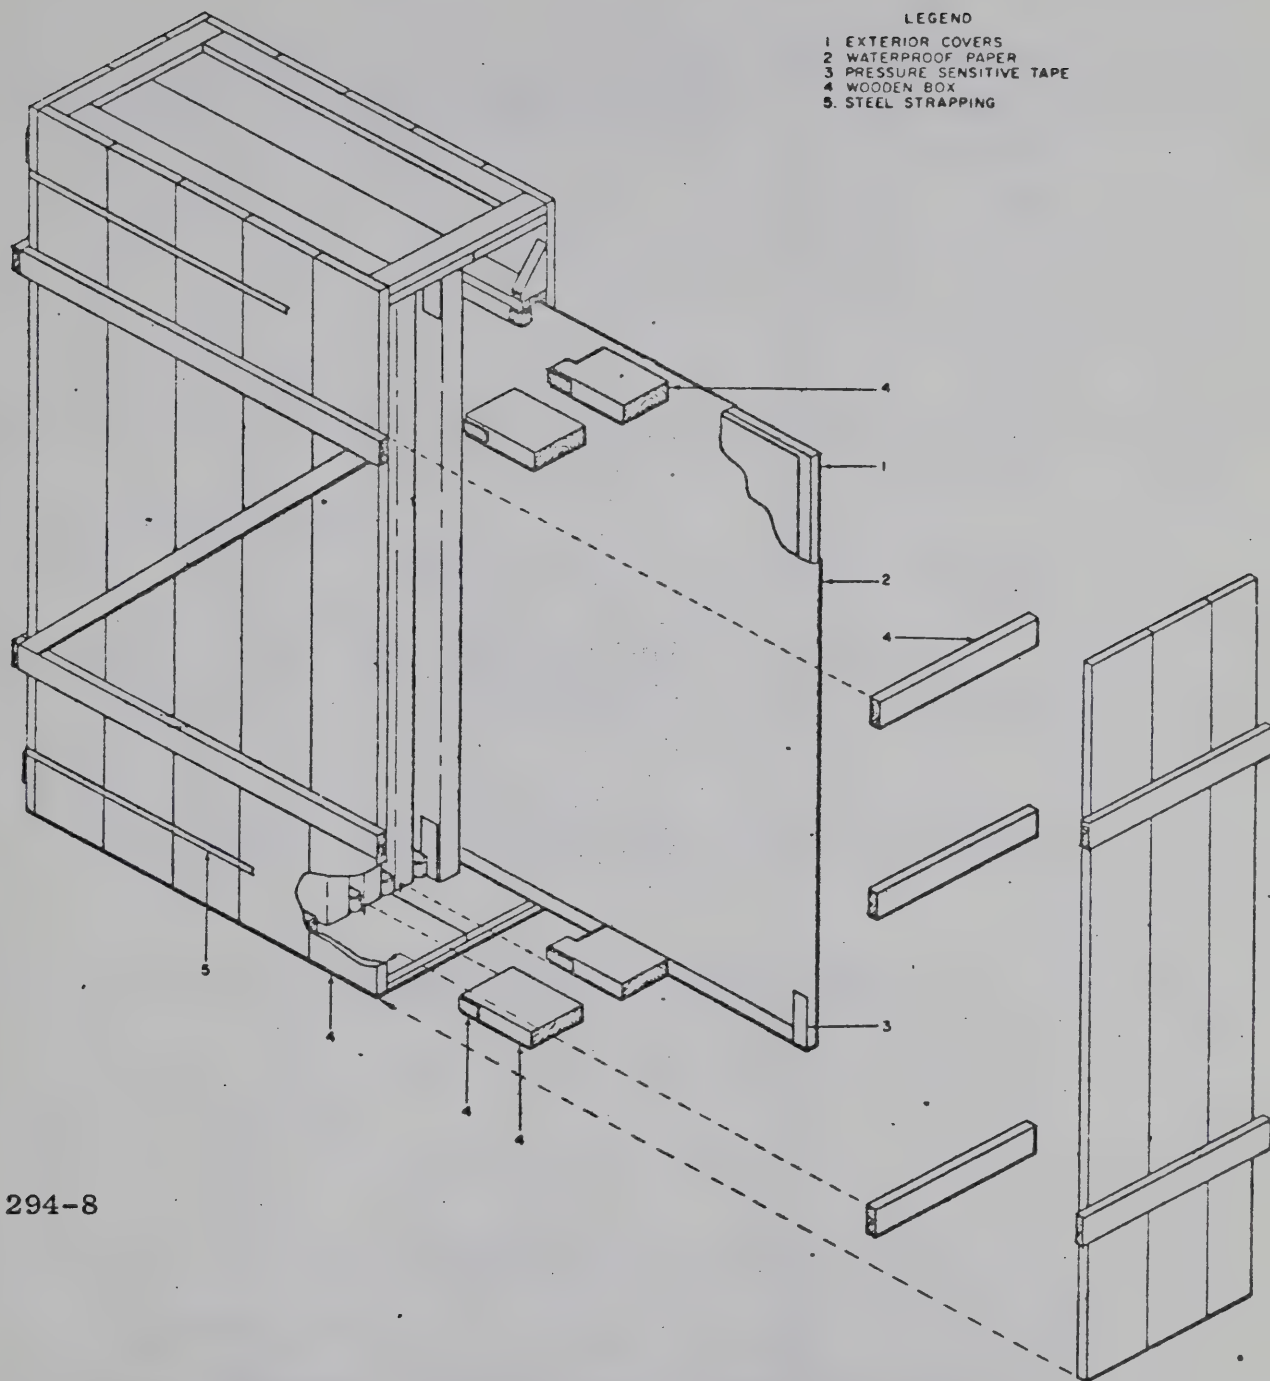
Typical Equipment Packaging (sheet 2 of 3).
